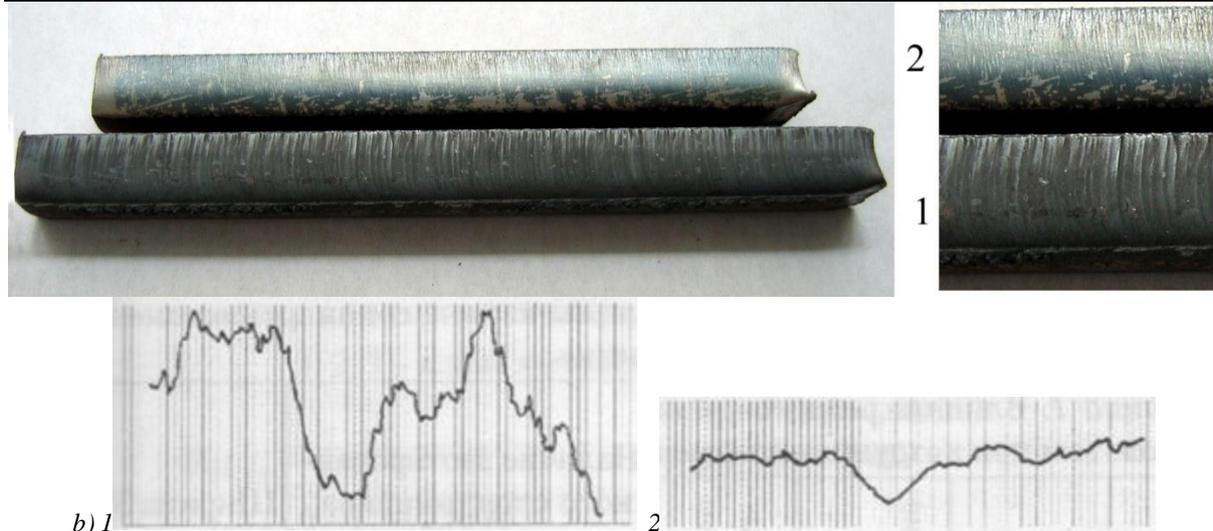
Appearance (a) and roughness profiles (b) of the surface of the edges of low-carbon steel workpieces after plasma cutting; plasma-forming medium: 1 – air; 2 – air + water [10].
